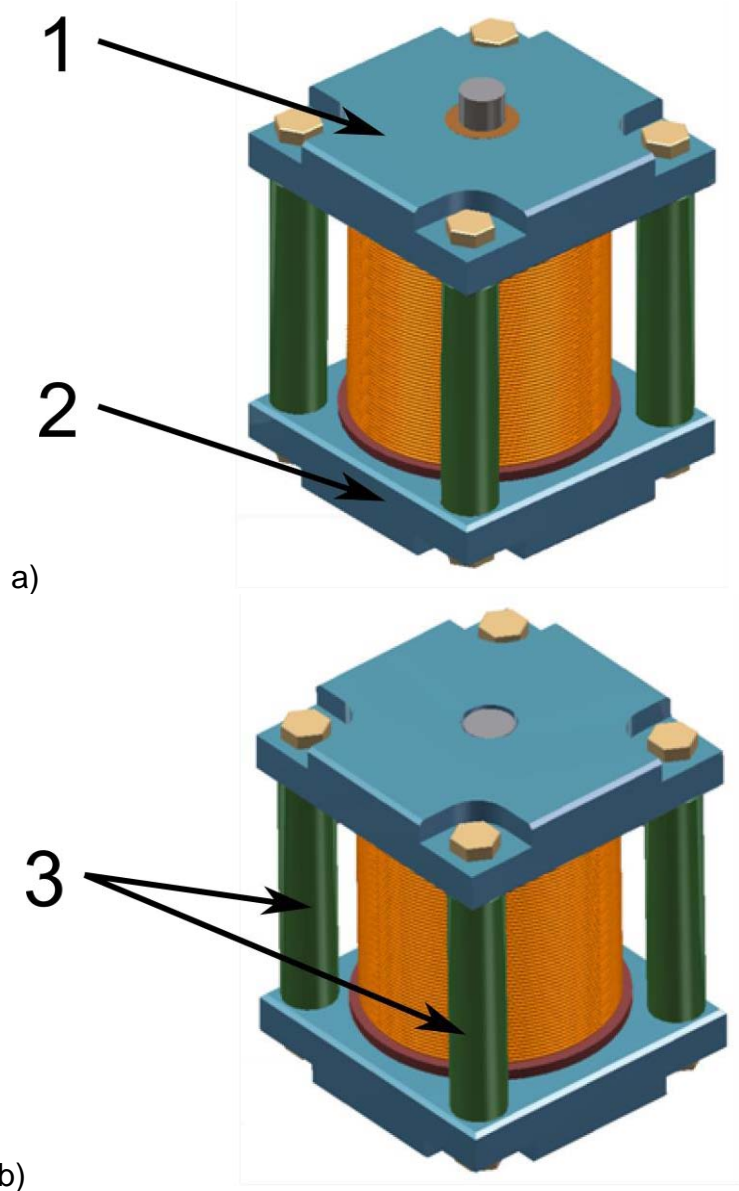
Model of the actuator: a) top view, b) bottom view. 1 - upper housing plate, 2 - lower housing plate, 3 - connection elements.
